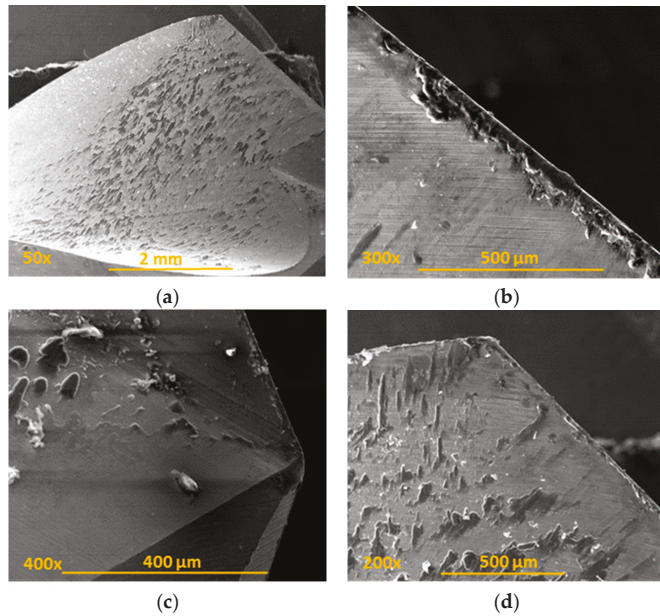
Wear located on the tool after conventional drilling of the CFRP/UNS A97075 stack: (a) Flute (BUL); (b) cutting lip (BUE y BUL); (c) tool tip; (d) joining of primary and secondary cutting edges (BUL).
